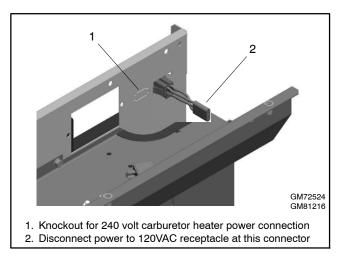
240 Volt Power Connection Location (controller and mounting plate removed for illustration)
